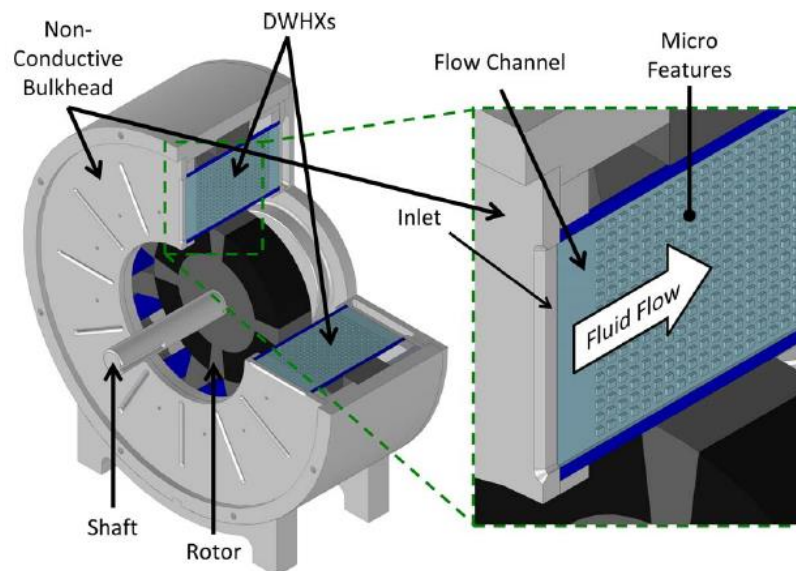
Direct Winding Heat Exchanger placed between windings [66]
